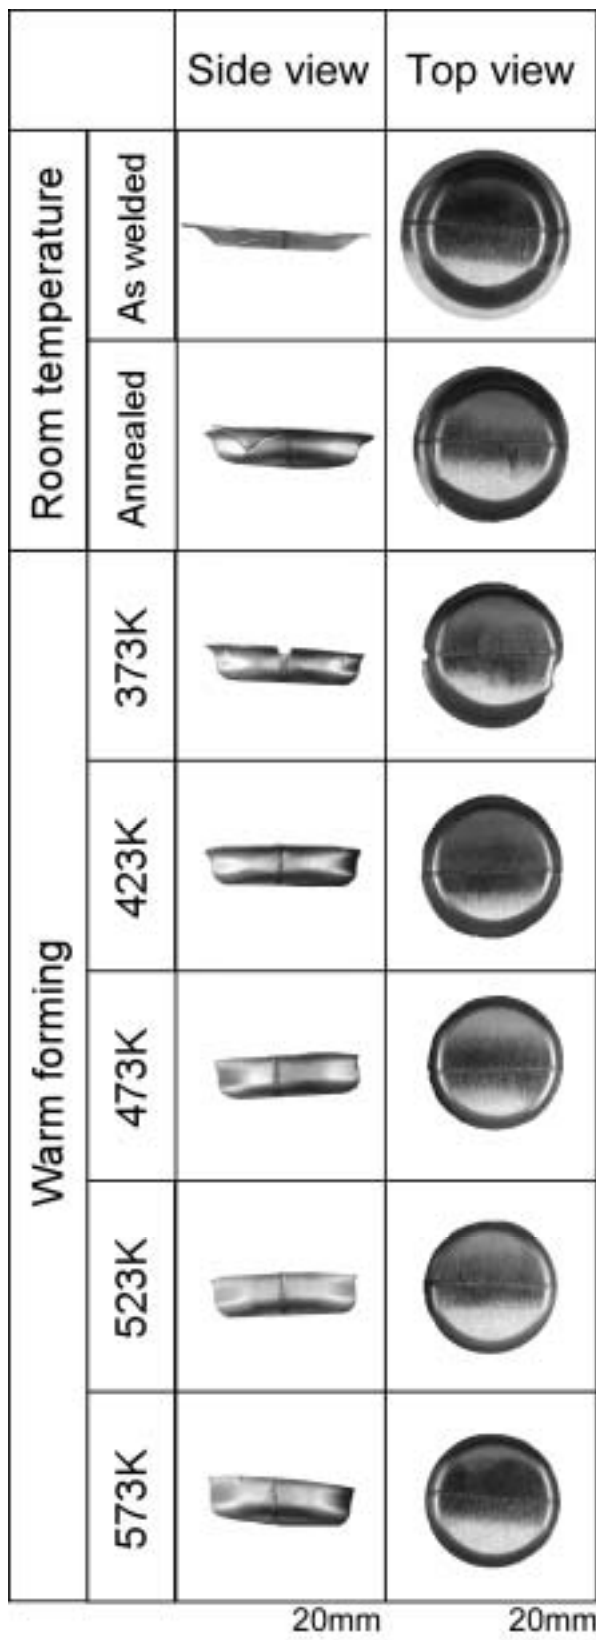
Appearances of drawing test specimen of laser welded joint. (AZ61)
